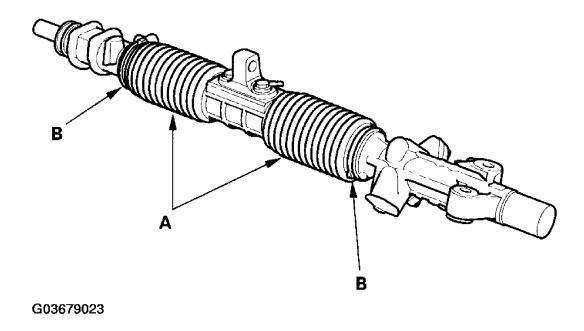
Identifying Boot And Boot Ends Courtesy of AMERICAN HONDA MOTOR CO., INC.
